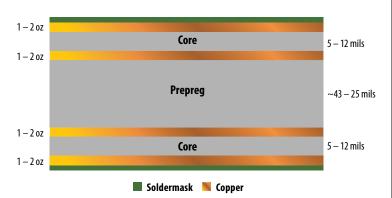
PCB stack-up for a typical PCB suitable for eGaN devices.
